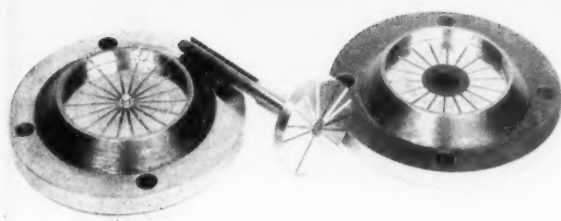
Rotor and Integral Die and Die Holder Having 18 Radial Grooves Instead of the Usual Serrations
